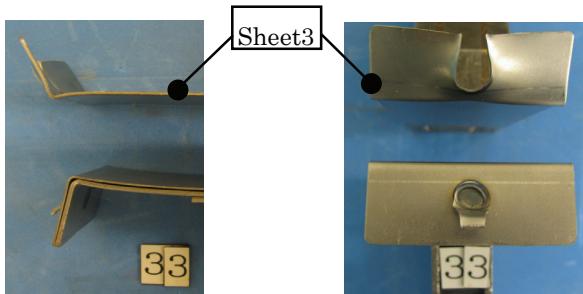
Ruptured shape of specimen including 3 sheets spot weld
